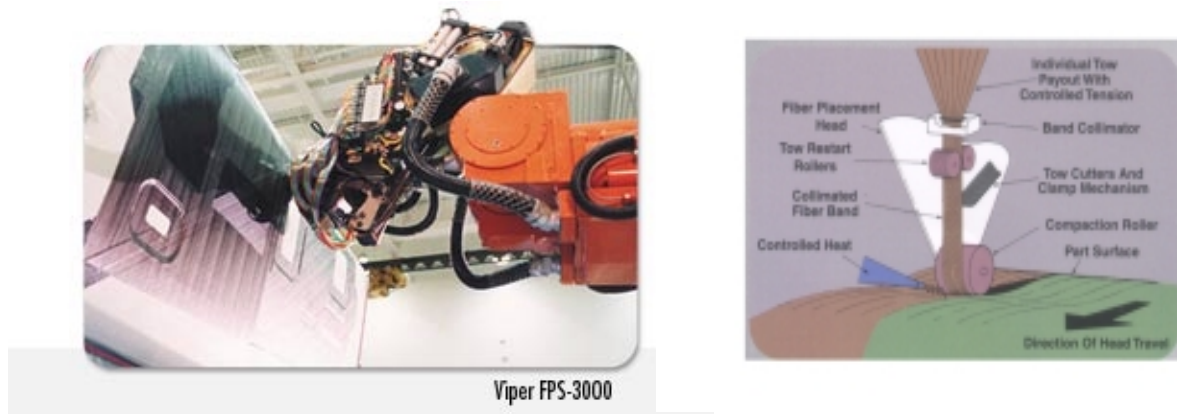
Viper(FPS-300) Fiber Placement Machine Head [37]
